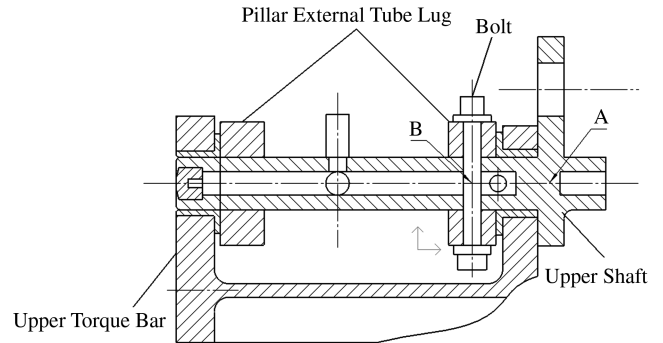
Assembly of the upper shafts, torsion bars, and pillar external tube lugs.
